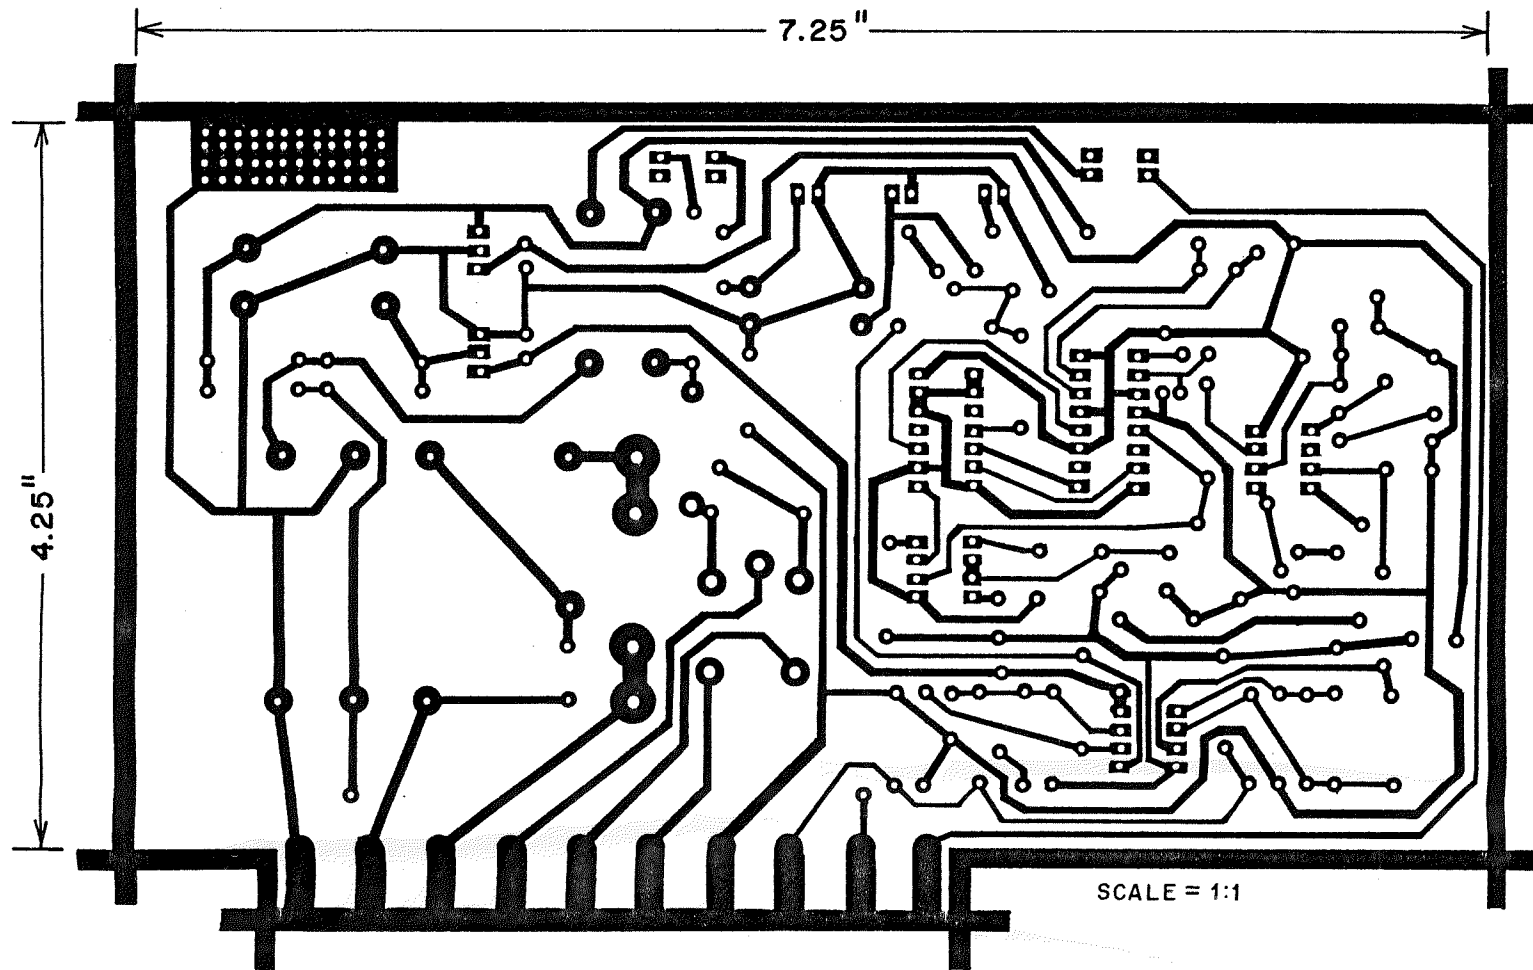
Foil Side of Prototype Digital Relay Printed Circuit Board.
